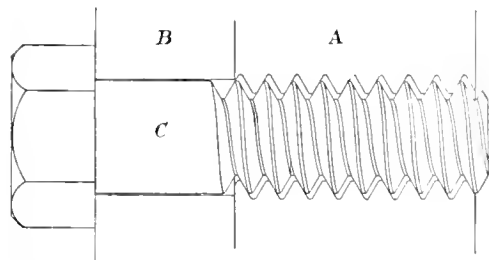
SCREW SMALLER THAN THREADED HOLE
